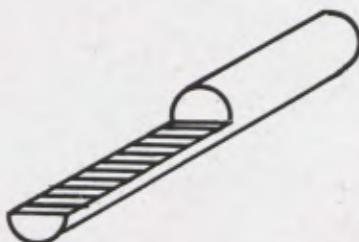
Pure copper rod cold drawn. Horizontal section.
